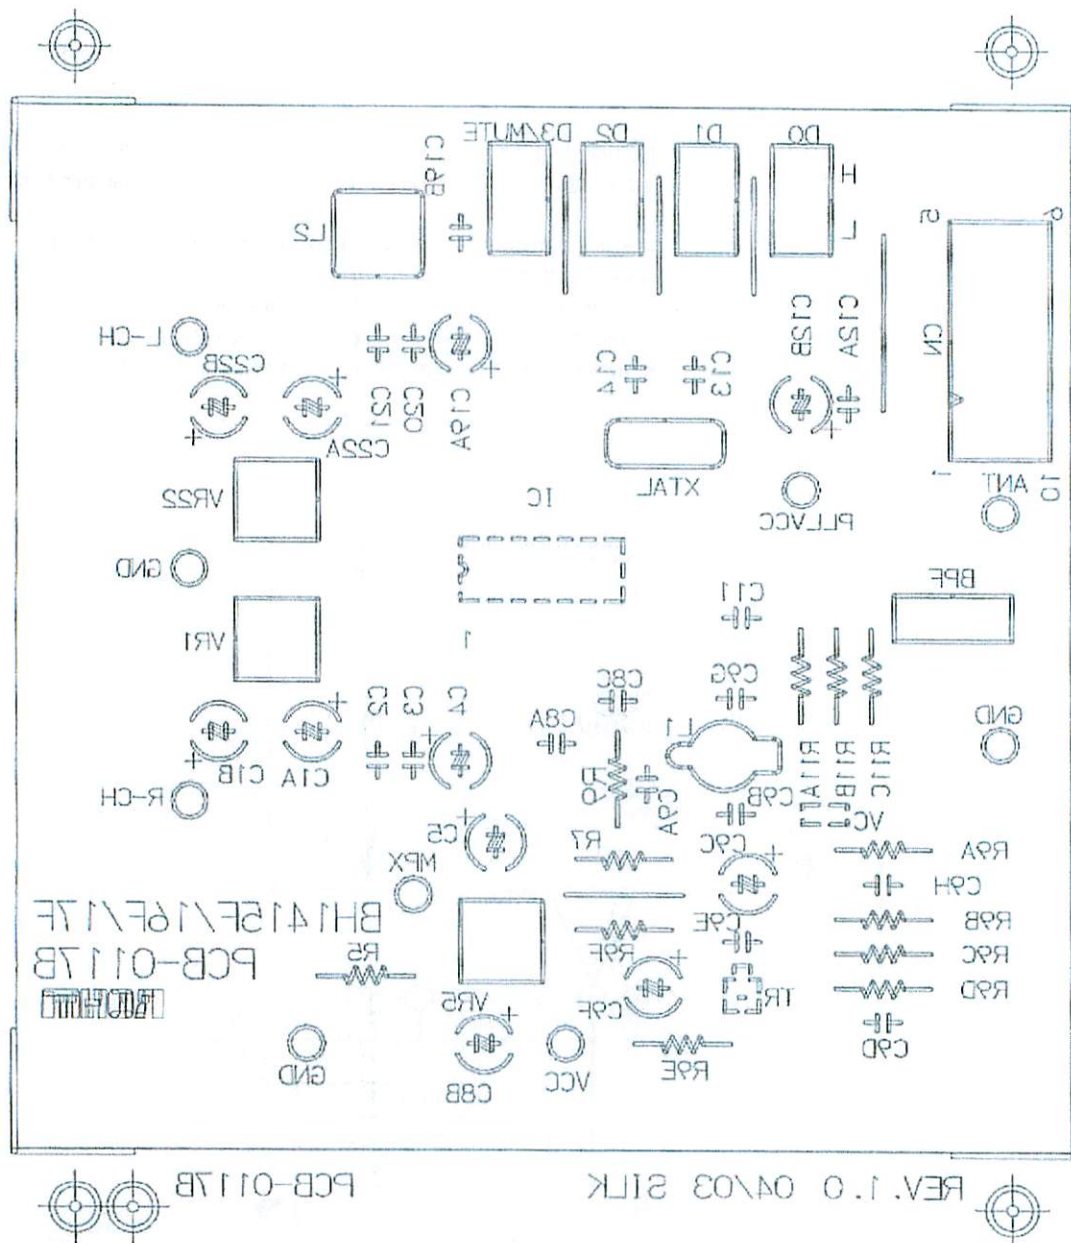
Evaluation board, Part surface silk (as viewed from soldered surface)
